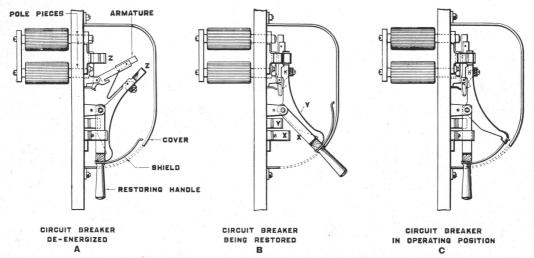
Sectional View of Cross Protection Circuit Breaker Parts similarly lettered make contact with each other.
